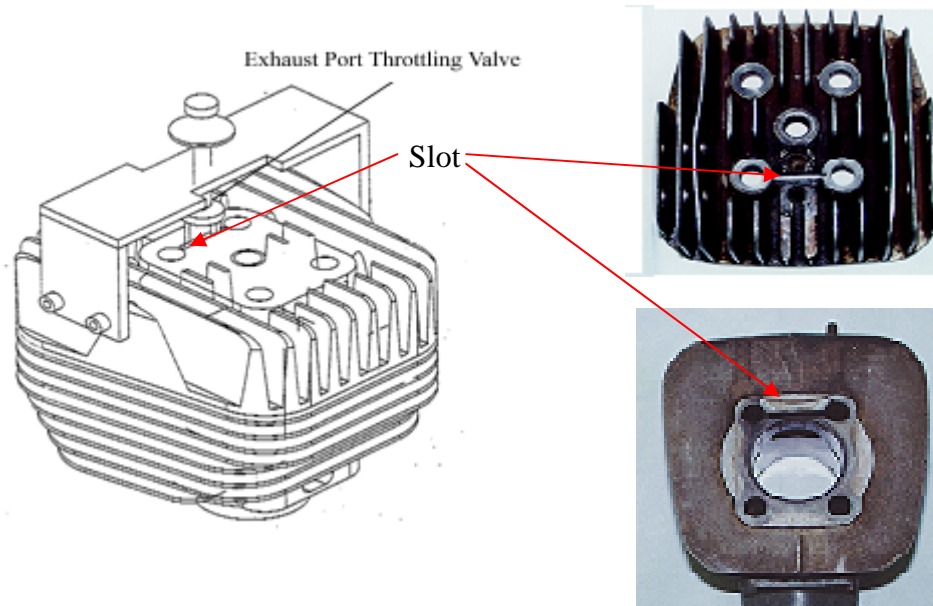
Illustration of the Throttling Valve Mechanism.
